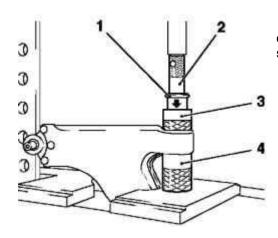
Mounting the front damping sleeve: 1 - damping sleeve, 2, 3, 4 - a special tool
